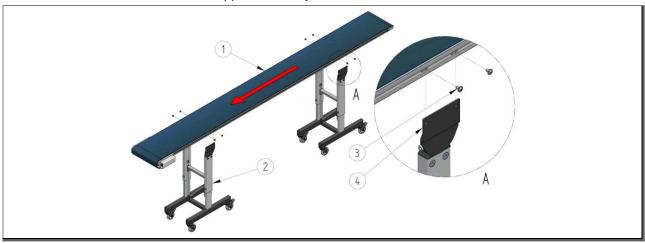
Assembly, conveyor with support HE 050 – HM 480 (typical)
